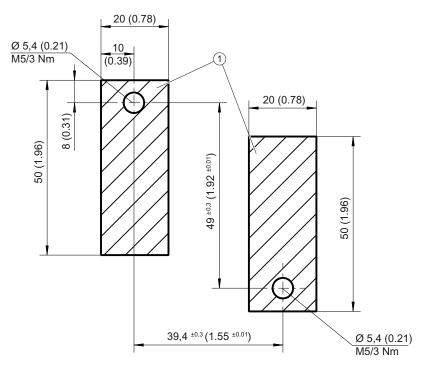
Dimension drawing of the DRIVE-CLiQ coupling, all dimensions in mm and (inches)
